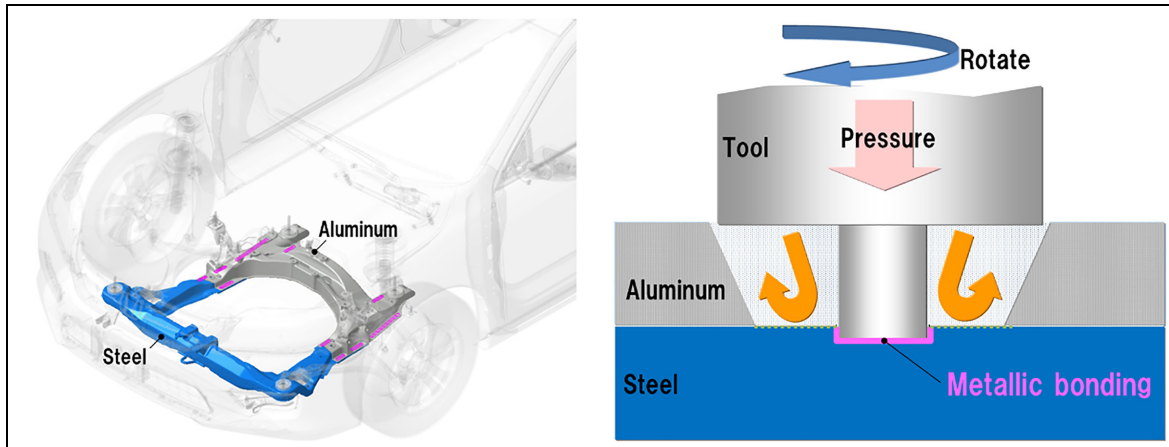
Honda Motor Co. – Application of friction stir welding and conceptual diagram of FSW of dissimilar metals.³⁹
